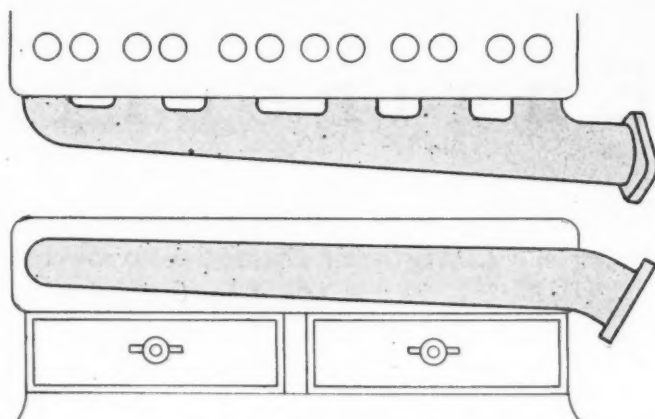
Top and side views of good exhaust manifold giving clean run for burnt gas
